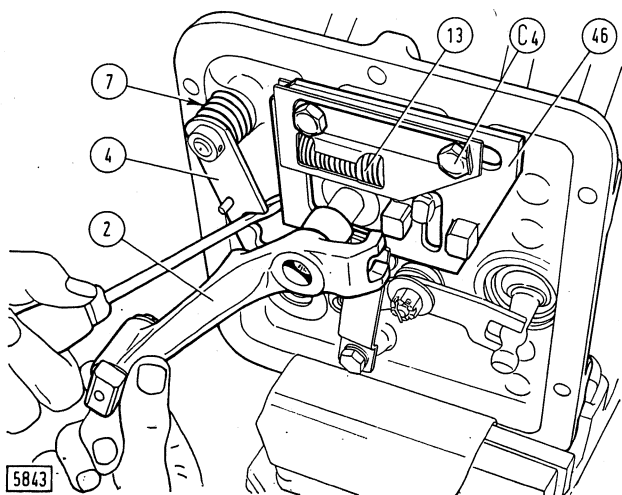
Fitting (removing) the reverse gear shifter fork (2).
